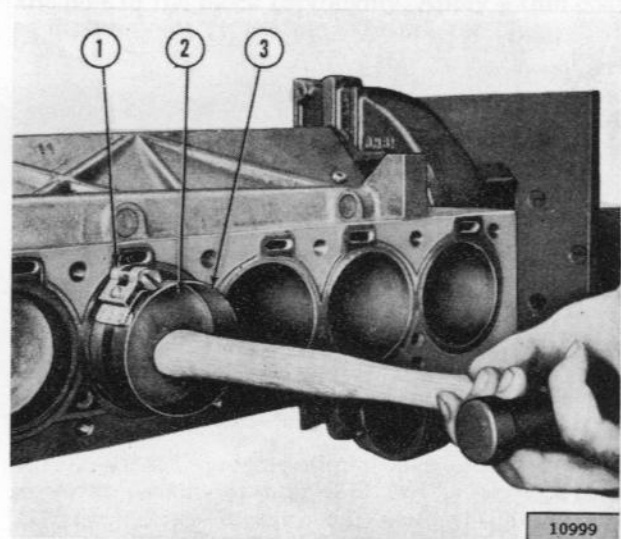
INSTALLING PISTON AND CONNECTING ROD ASSEMBLY
